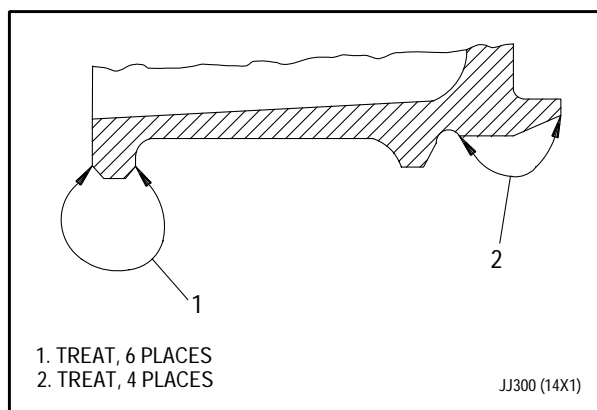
Front Compressor Drive Turbine Shaft Stiffeners Assembly - Antigalling Compound Application
